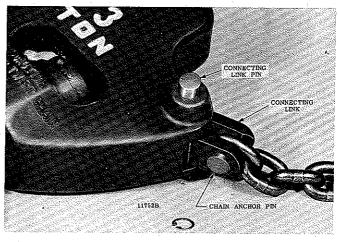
Removing Connecting Link Pin From 3 Ton Lower Block Assembly.
